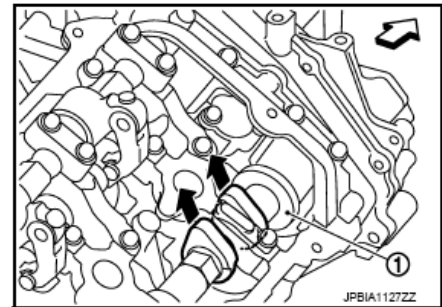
Identifying Exhaust Cam Nose On No. 1 Cylinder (Engine Front Side Of Bank 1)
